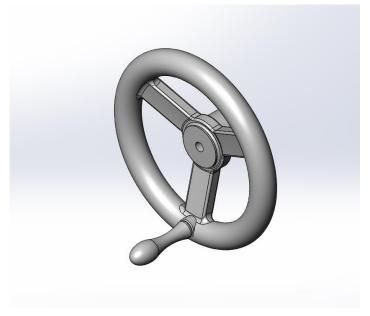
Hand Crank Replacing Arm Lever on Gear Box
